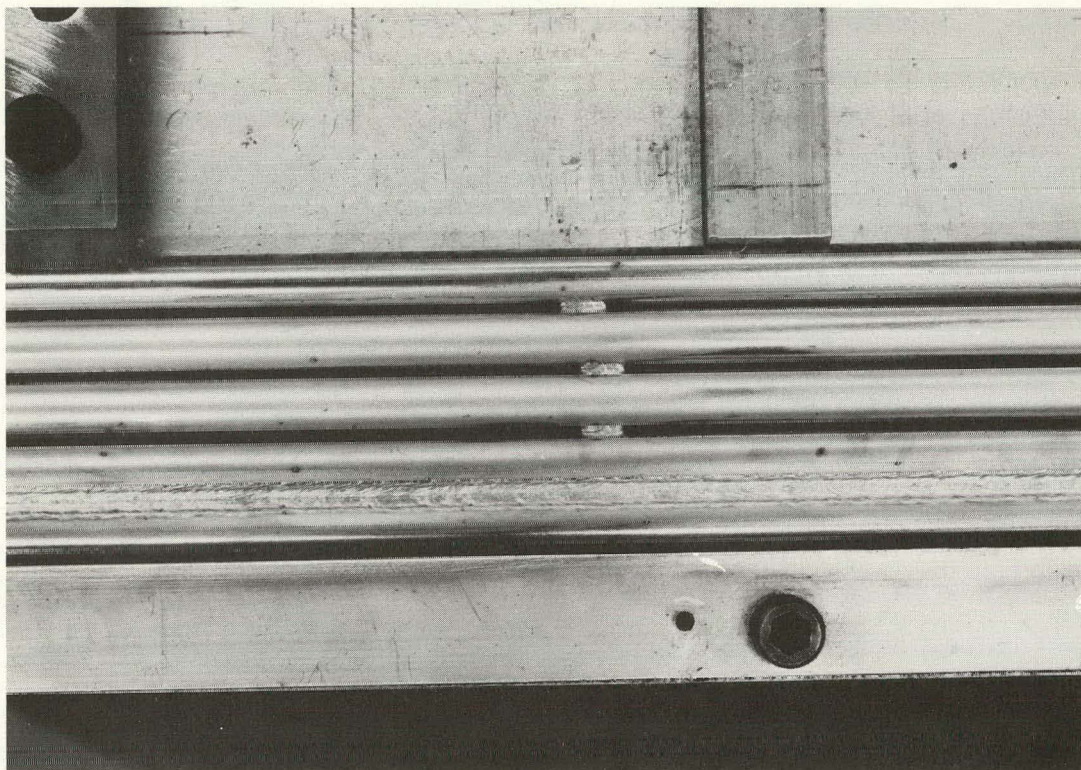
Tack Welds and First Weld Pass on Five-Tube Panel
